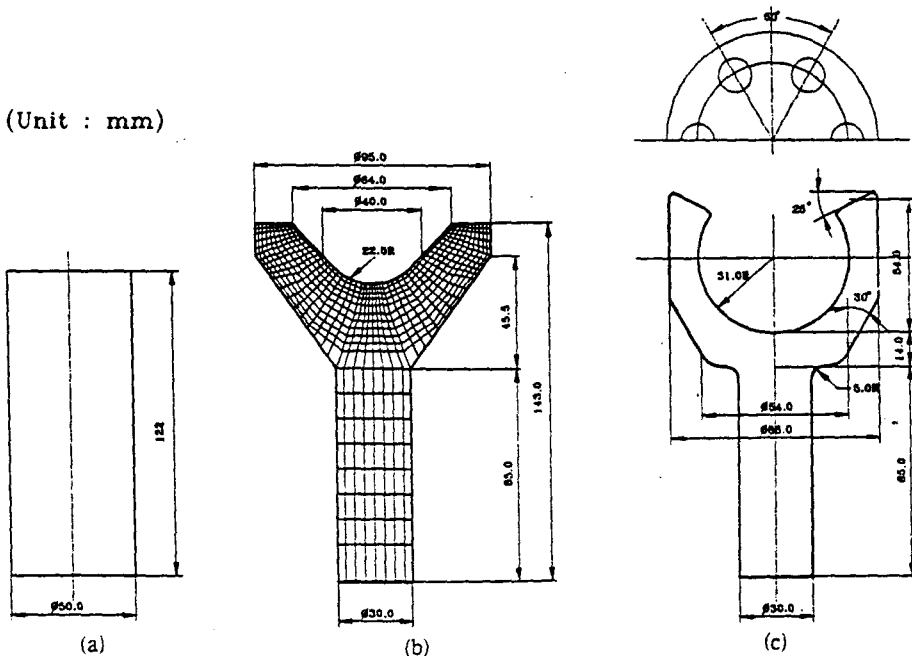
Dimensions and configurations of (a) initial billet, (b) preform after closed die forging and (c) final product
